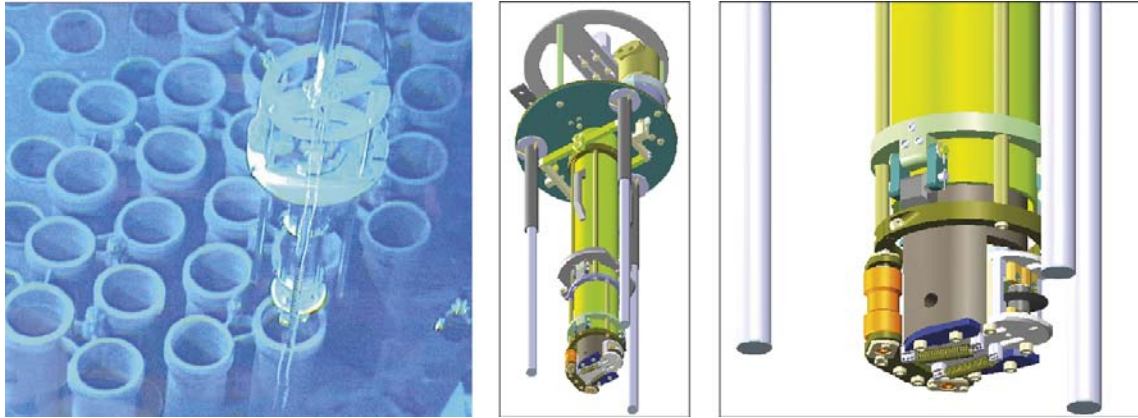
The tube cutter is positioned above the CSH piping. 3D-model views of the tube Cutter.
